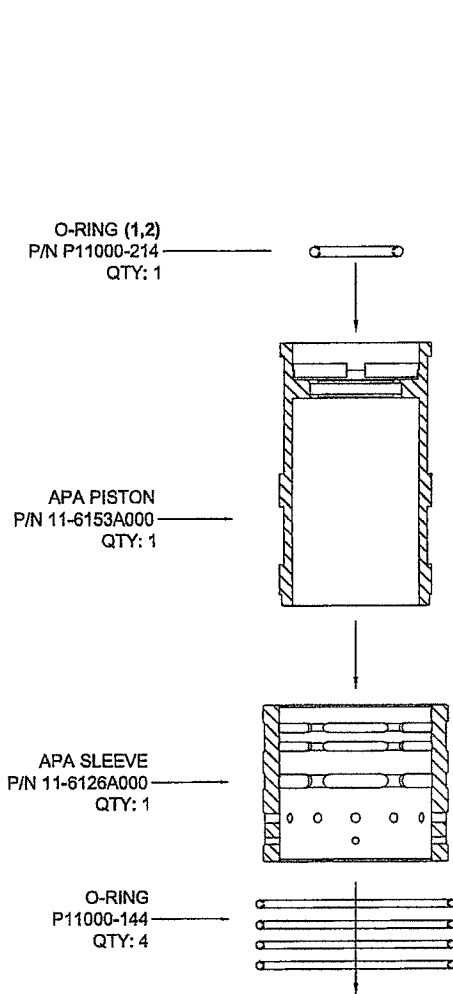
LUBRICATED APA VALVE PART CONFIGURATION.
